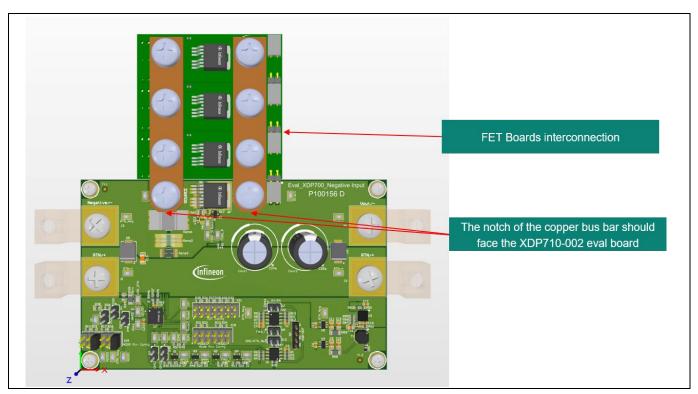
MOSFET adapter board interface with XDP700-002 Evaluation Board
